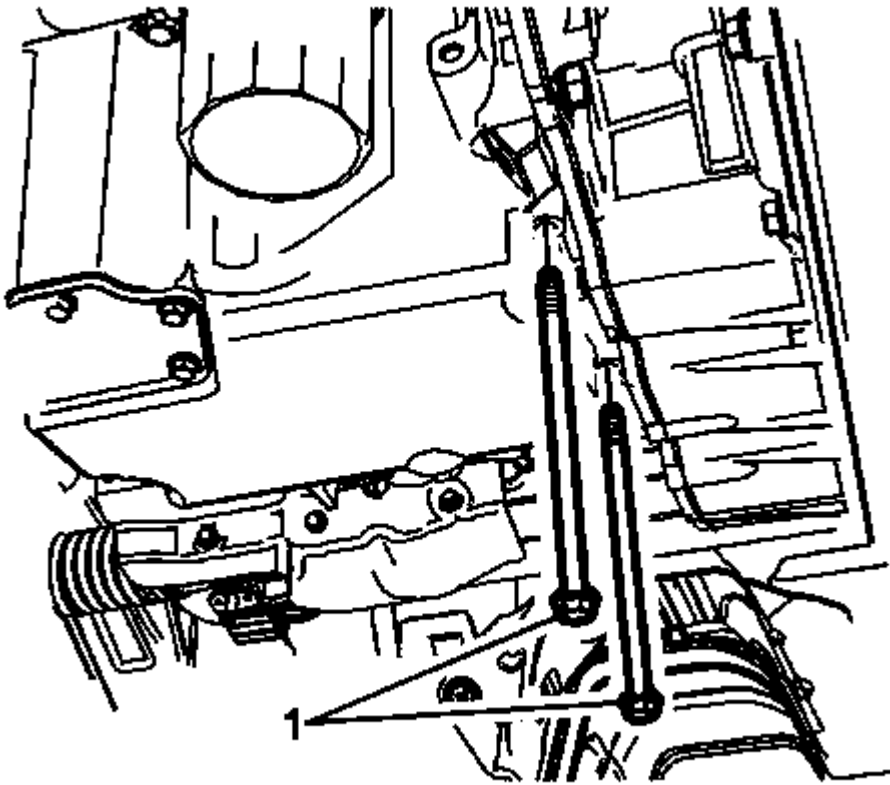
Rear Oil Pan to Engine Block Fasteners
